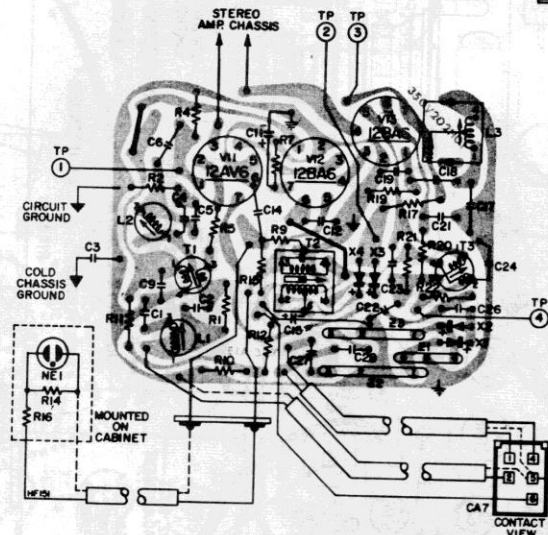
Bottom View of FM Stereo Adapter Chassis Showing Top Components in Solid Outline. Tube Pin Numbering Is For Bottom of Socket.
